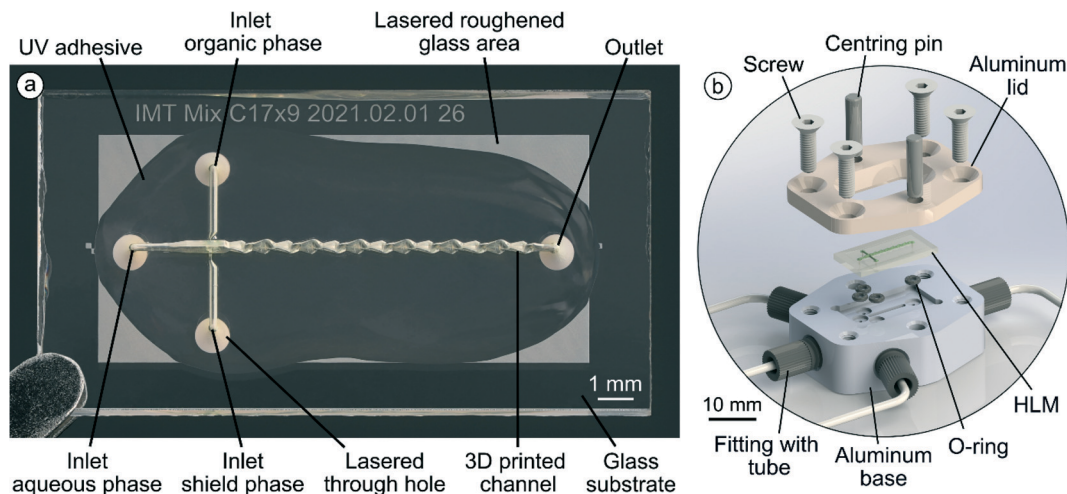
a) Photograph of the microfluidic glass chip with a 3D printed channel of system B. The chip contains four through holes (3 inlets and 1 outlet). Dust particles on the chip have been digitally removed to not distract the viewer. b) Exploded view of the mounting bracket together with the HLM system.
